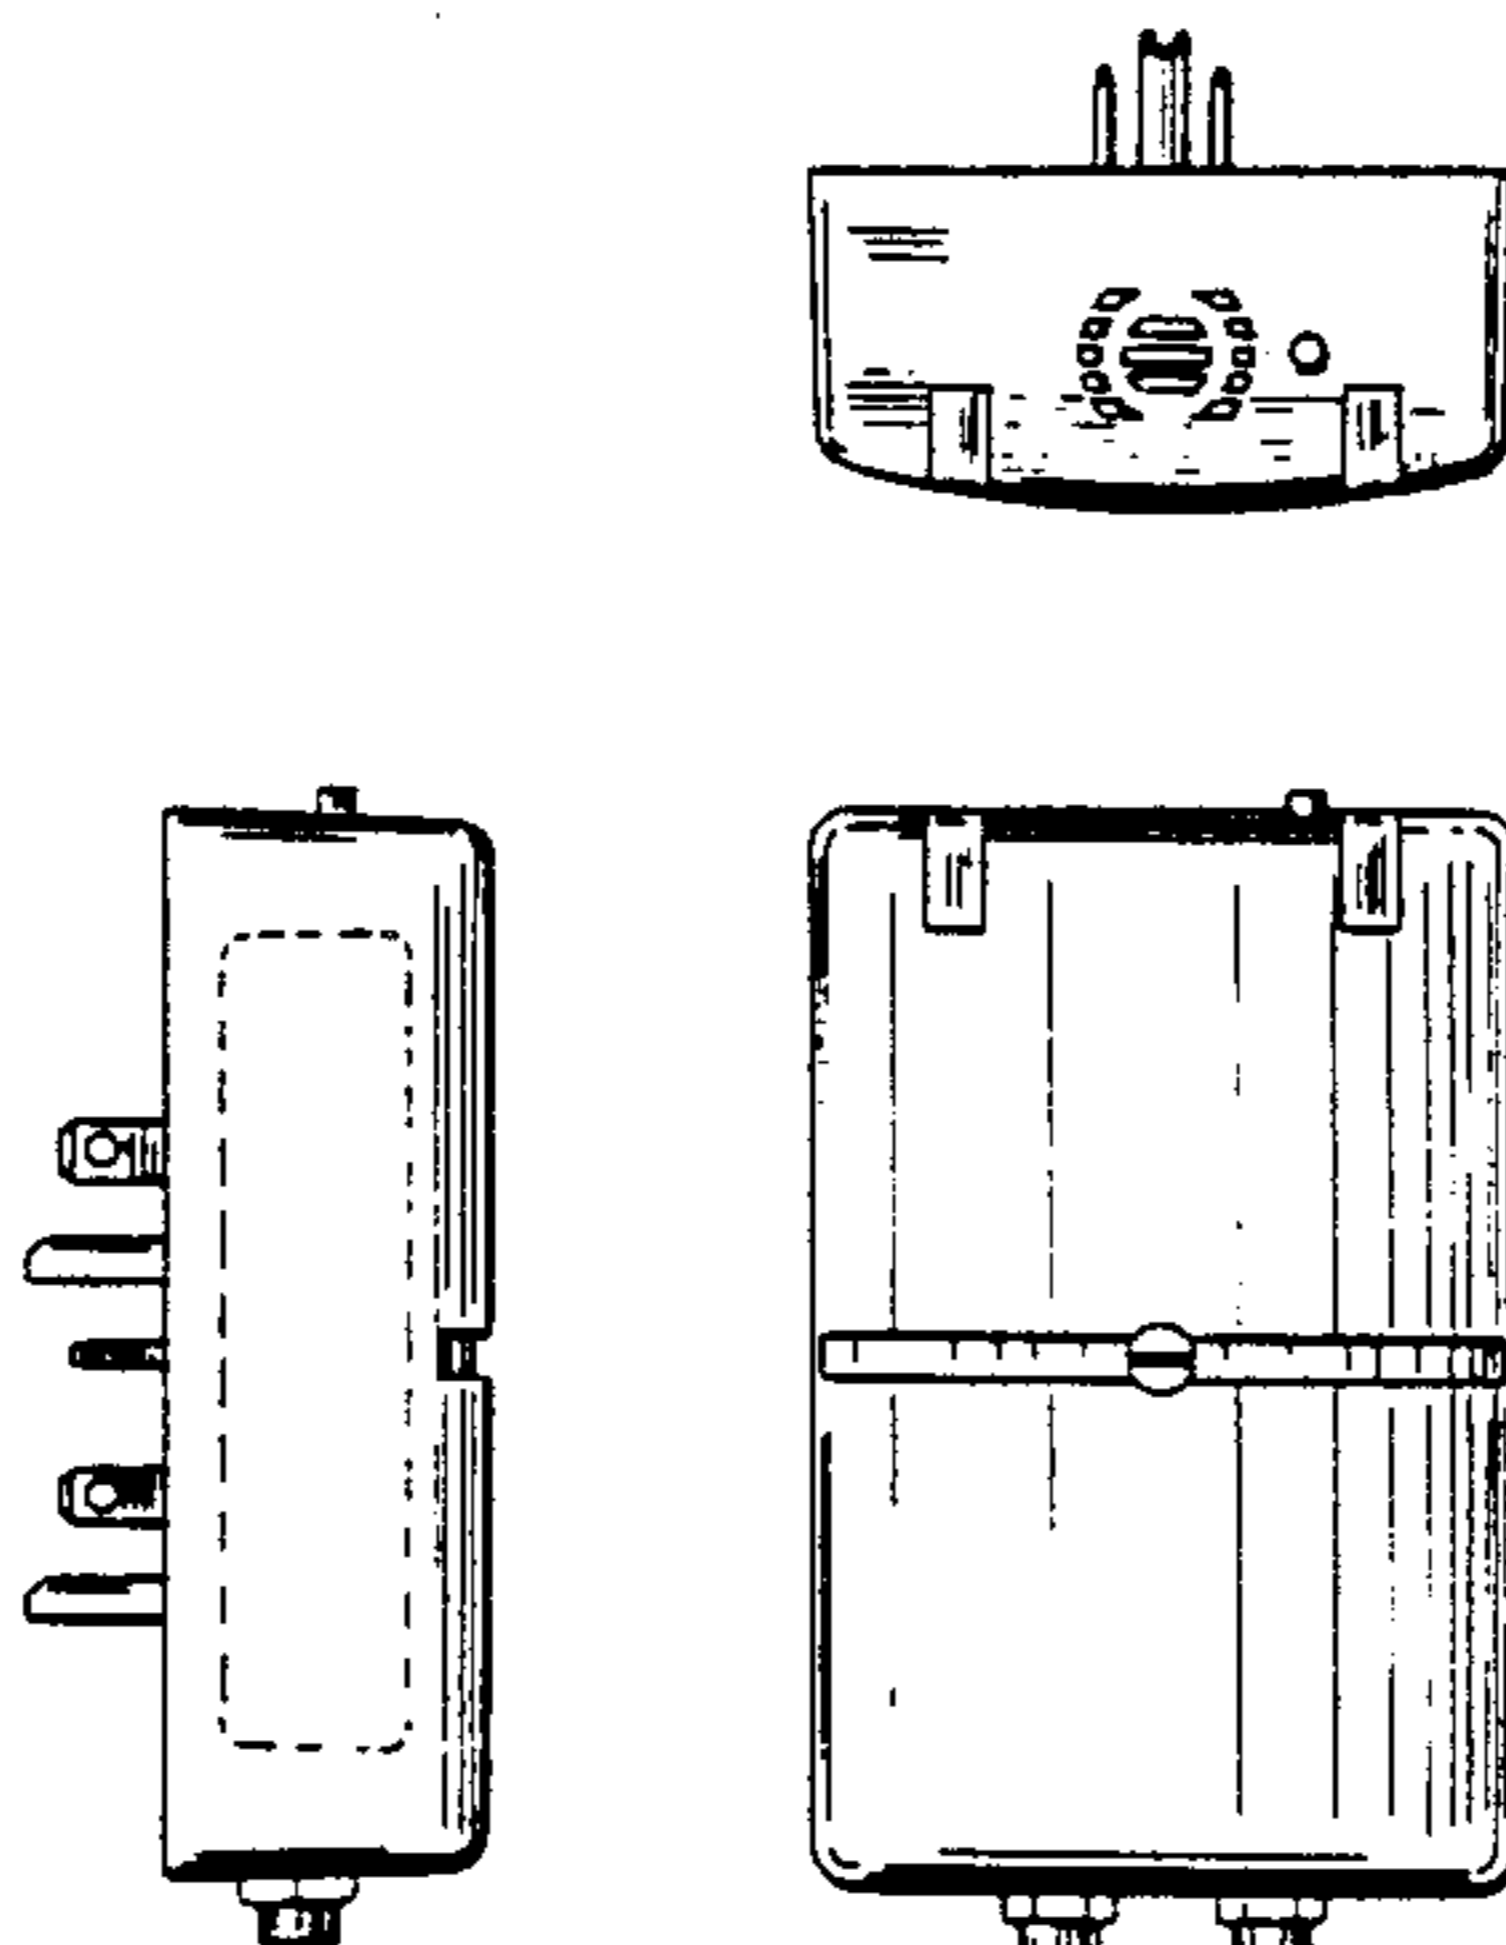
is a bottom plan view of the fourth, fifth and sixth embodiments;
